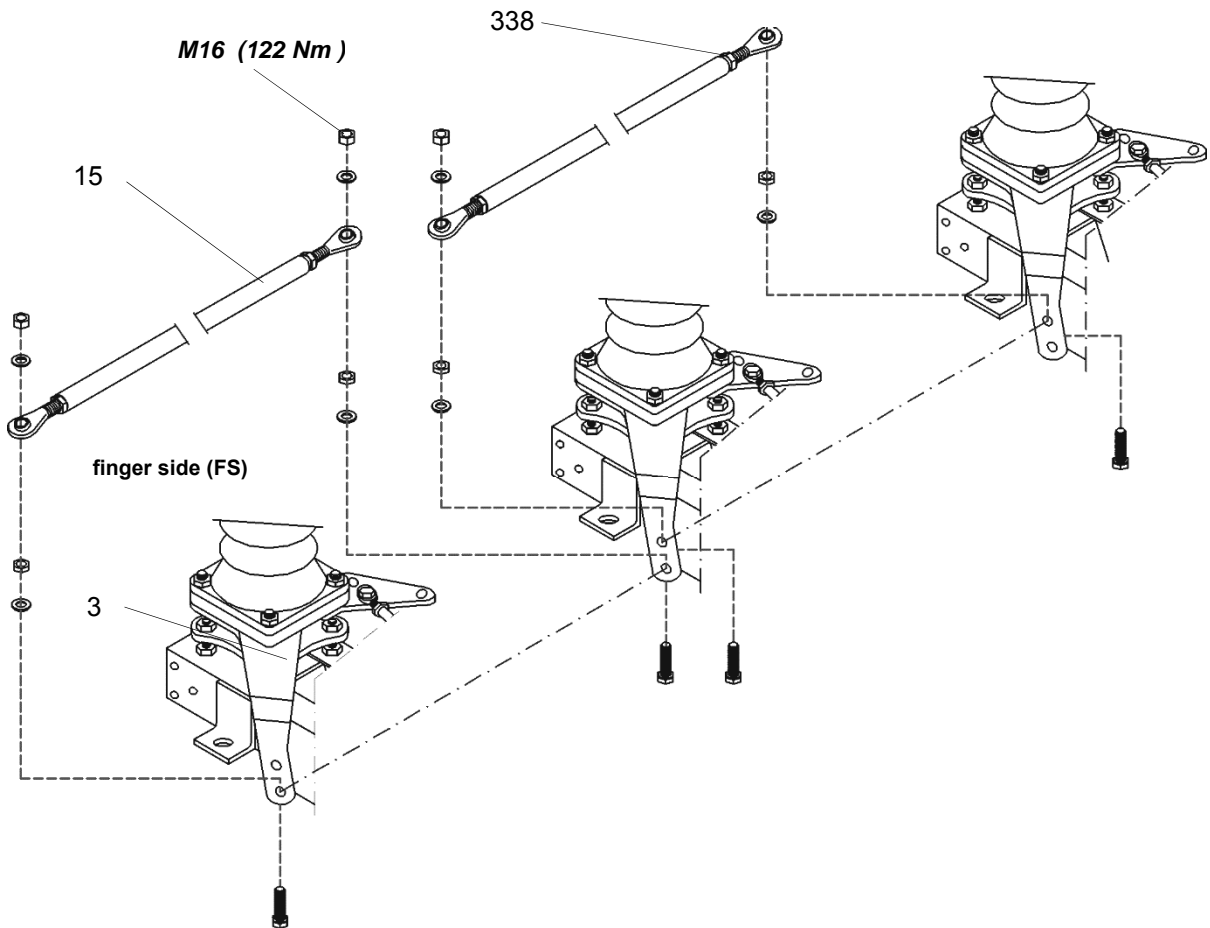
Mounting operating mechanism for disconnecter, wall mounting
